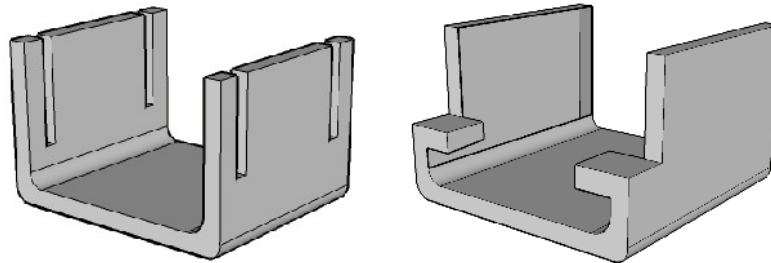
The U-shape shield can be slotted as shown in the left picture. This edge can be bent and directly crimped on the conductor as shown in the right picture.
